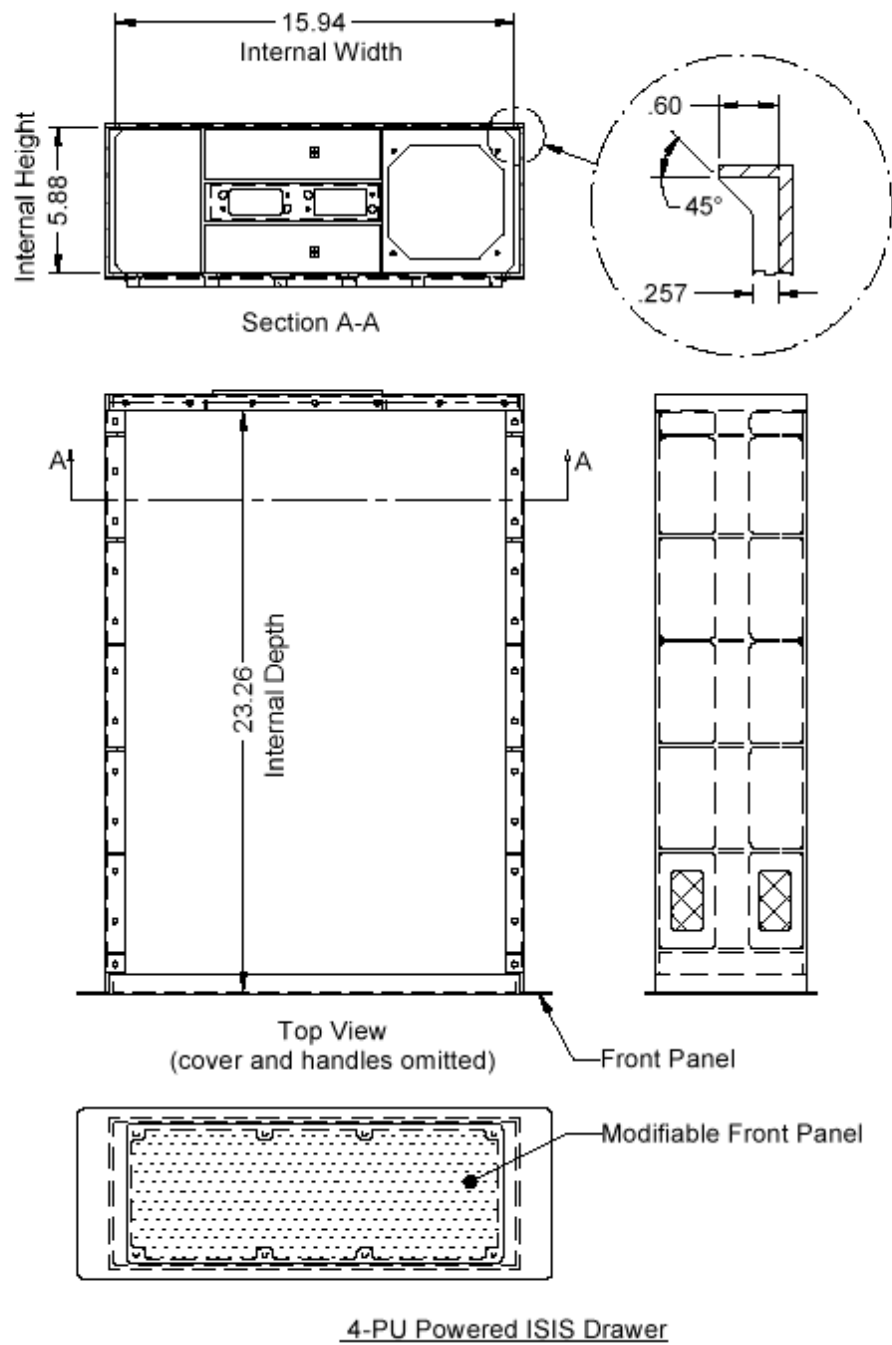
ISIS DRAWER INTERNAL DIMENSIONS (Sheet 3 of 3)
